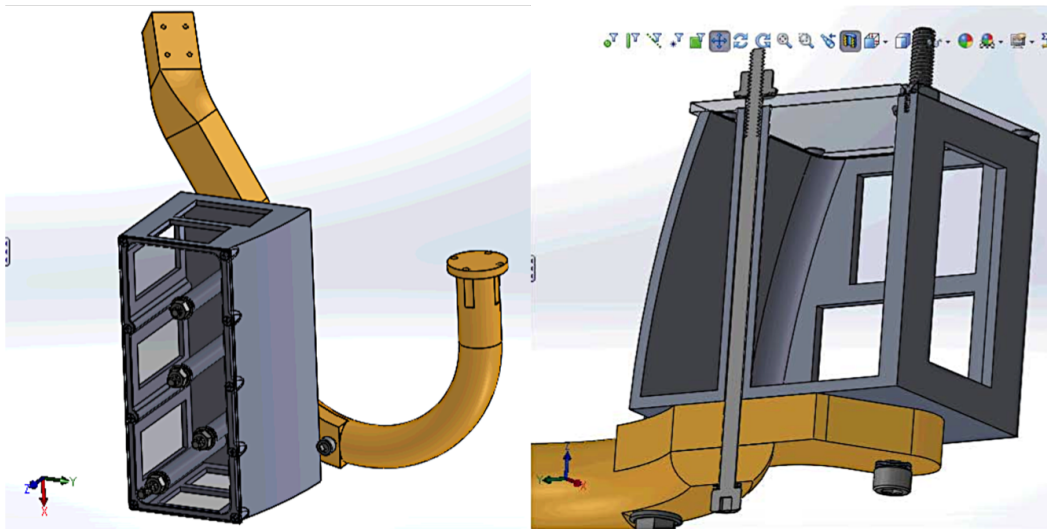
View of the Flight coldlink and charcoal getter. The getter is pressed against the coldlink with four long screws inside hollow cylinders that will also keep the charcoal uniformly cold.
